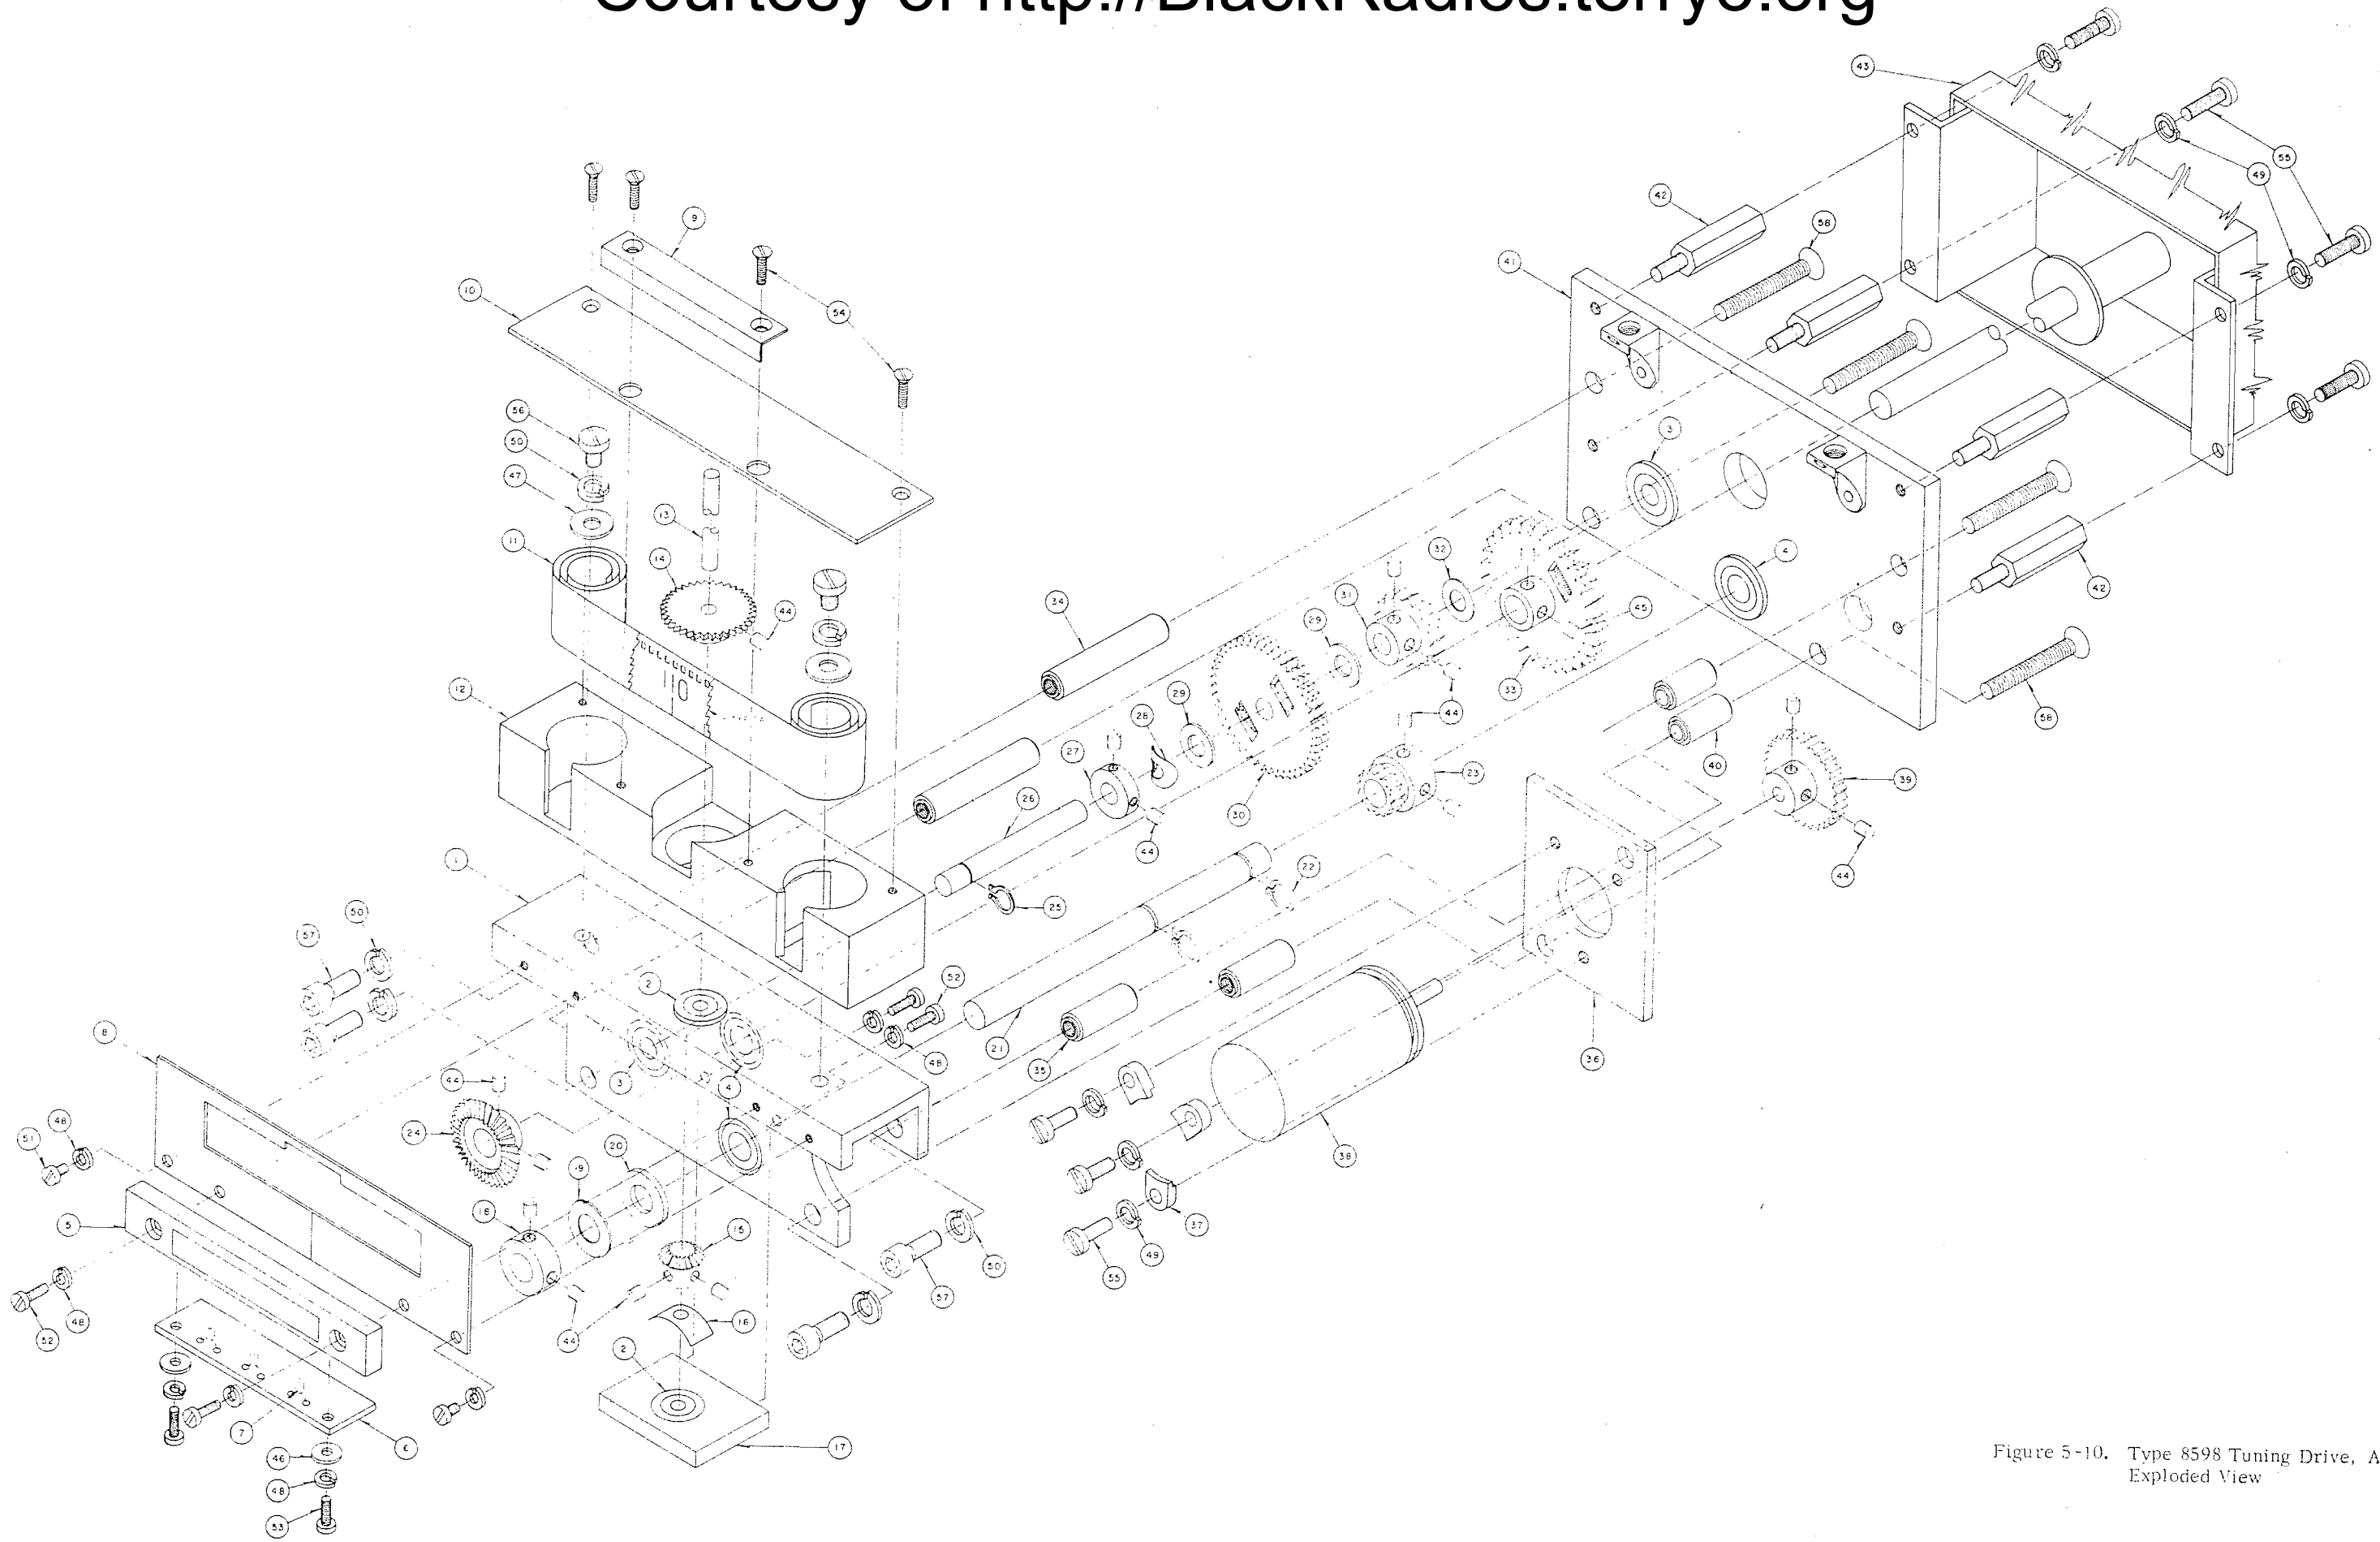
Type 8598 Tuning Drive, A1A2, Exploded View
